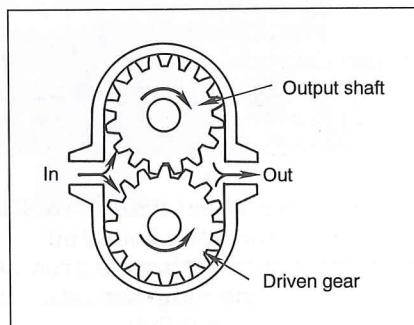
Fluid flow turns the gears and rotates the shaft in gear-on-gear motors.
